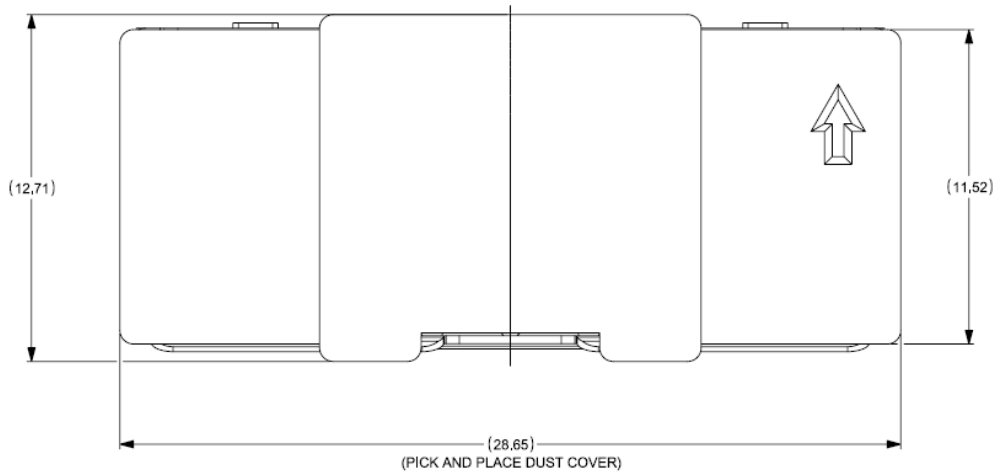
Top View of Fixed-Side Connector with Dust Cover
